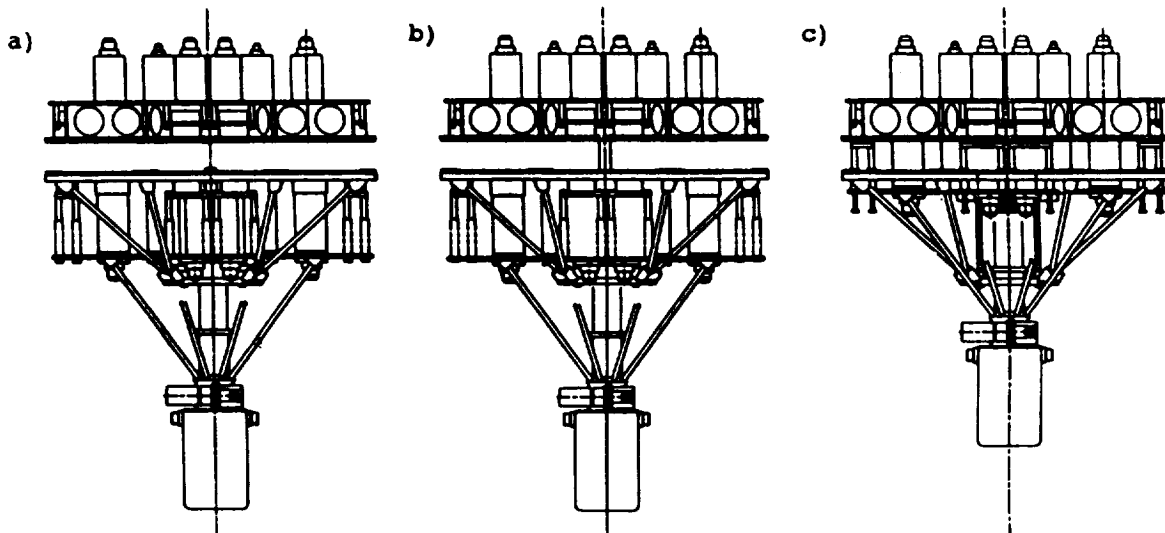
a) Disengaged, b) Actuator Extended, c) Engaged.
